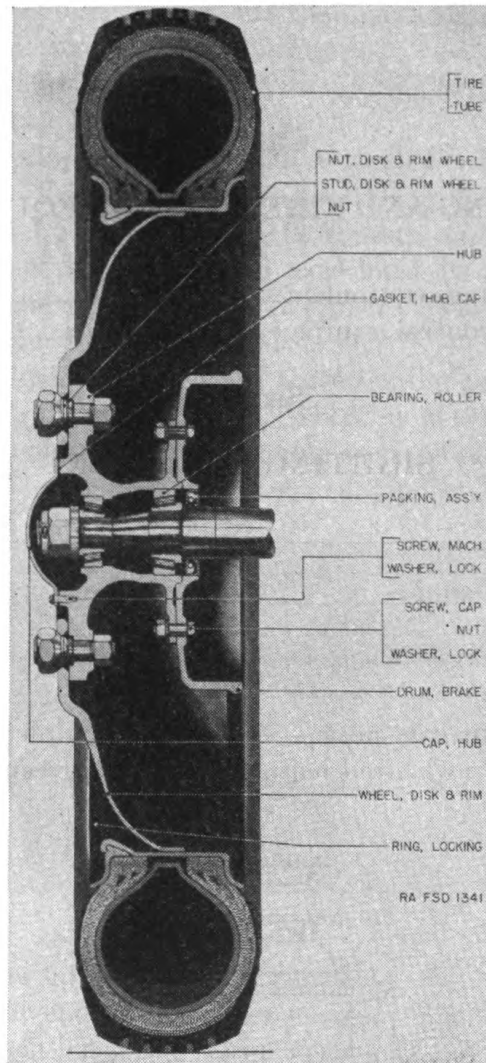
Wheel, disk, and rim with brake and tire, assembly.
